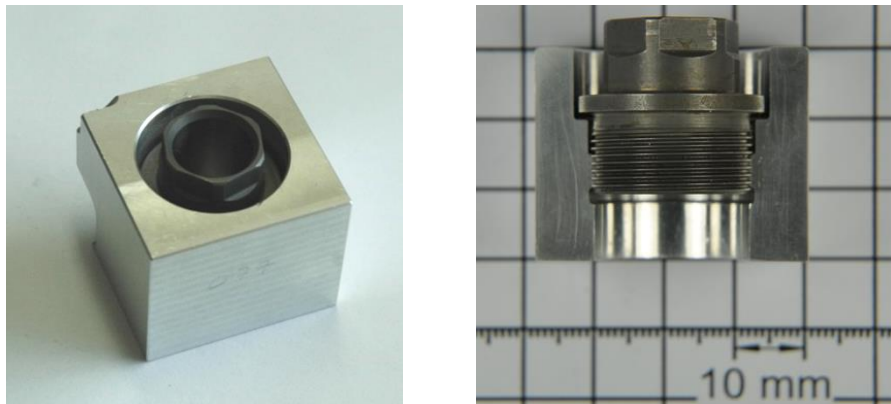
Steel/aluminum tapped thread joint: Left = top view, right = half-section
